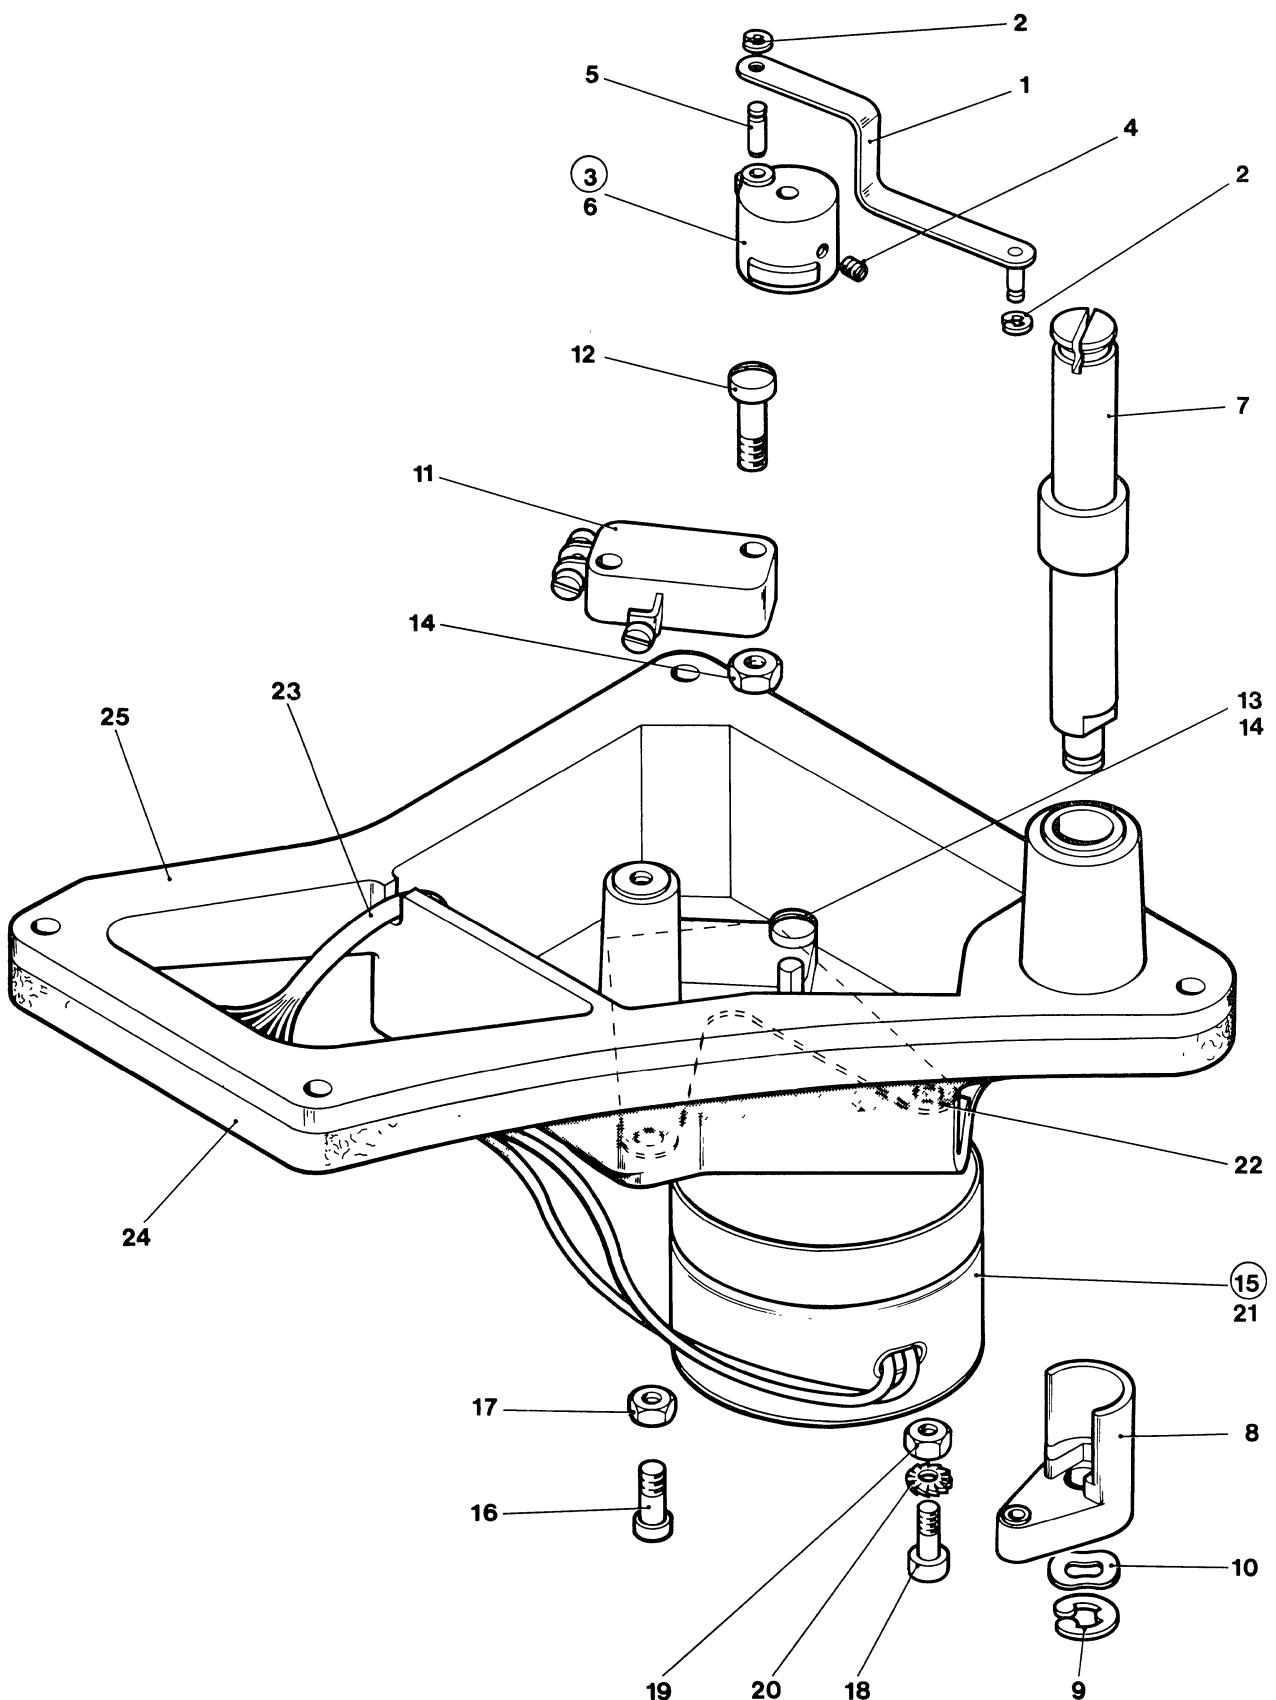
BRUSH DRIVE ASSEMBLY - 60HZ
